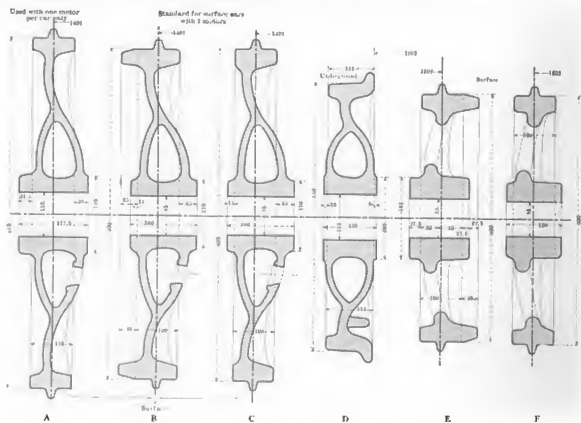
SECTIONS OF ALL TYPES OF WHEELS USED ON BUDA-PEST STADTBahn AND UNDERGROUND RAILWAY
